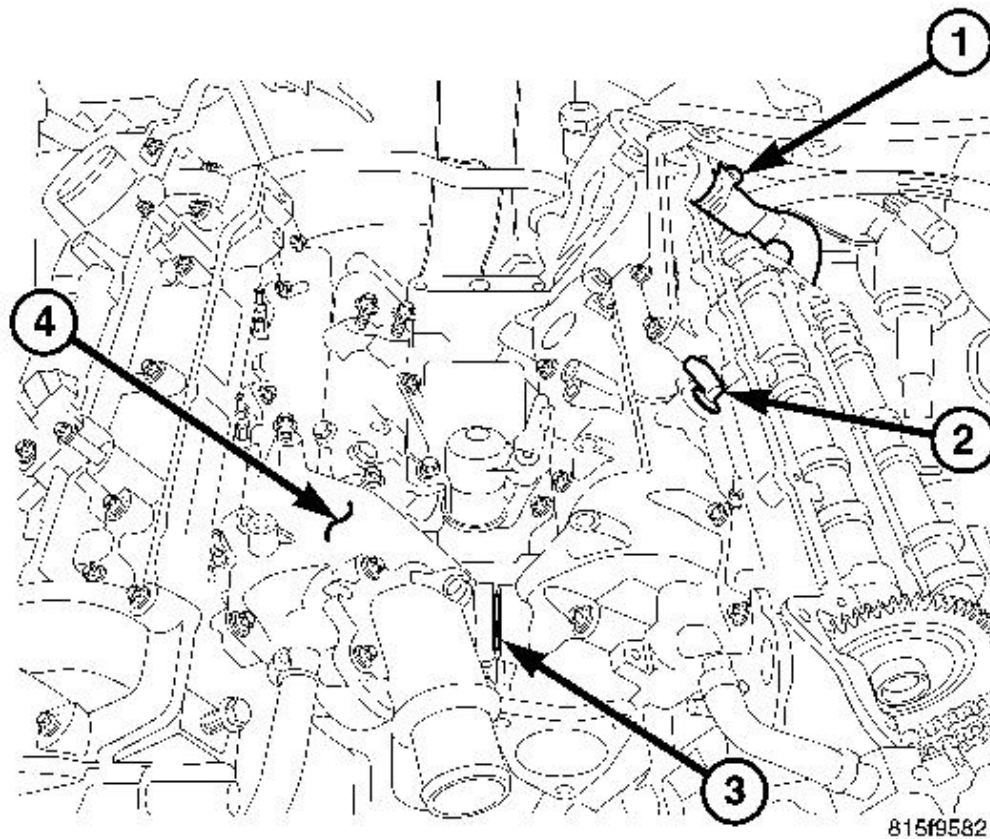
EGR Coolant Pipe, Coolant Temperature Sensor, Intake Coolant Passage & Intake Manifold
